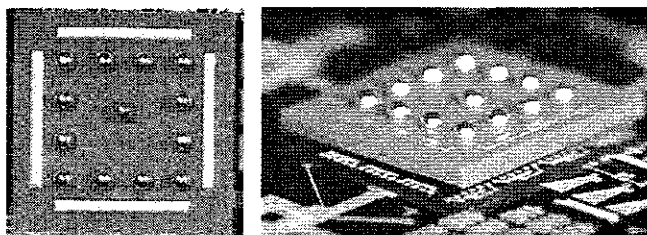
Straight and angled photographs of a ceramic via lid package with solder balls, taken prior to surface-mounting. 12-mil, Sn/Pb (63%/37%) solder balls were mounted onto 0.3 mm diameter pads coated with electroless Ni-Au.
